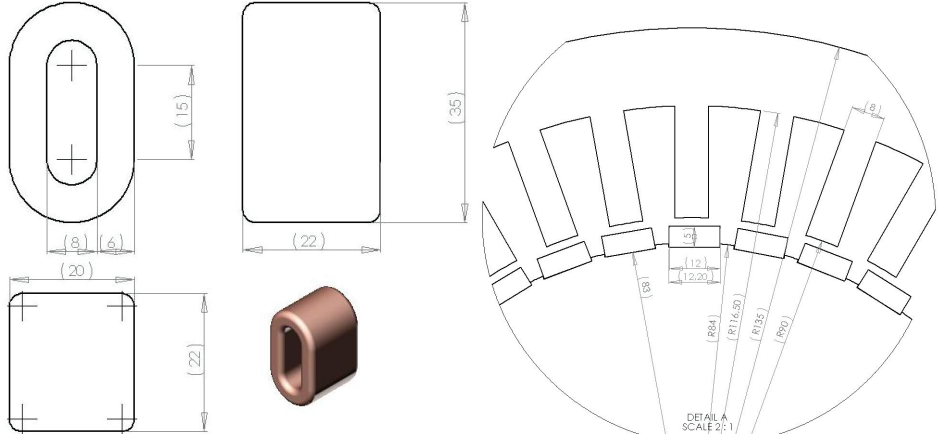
The coil to the left and the stator and rotor dimensions of the table model
